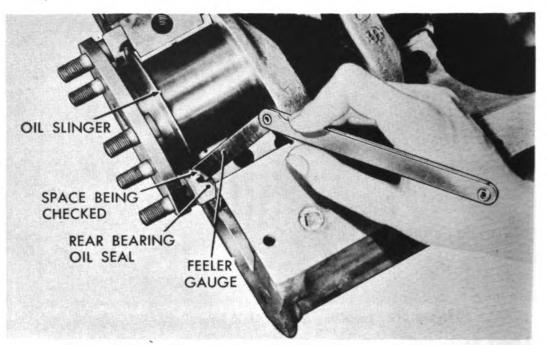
Checking Clearance Between Slinger and Oil Seal.
